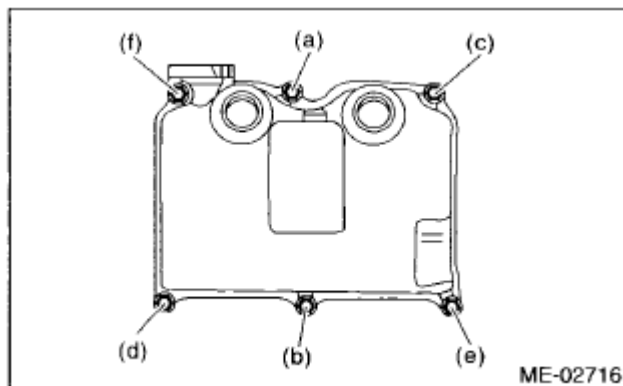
Identifying Rocker Cover Bolts - LH Side Tightening Sequence
